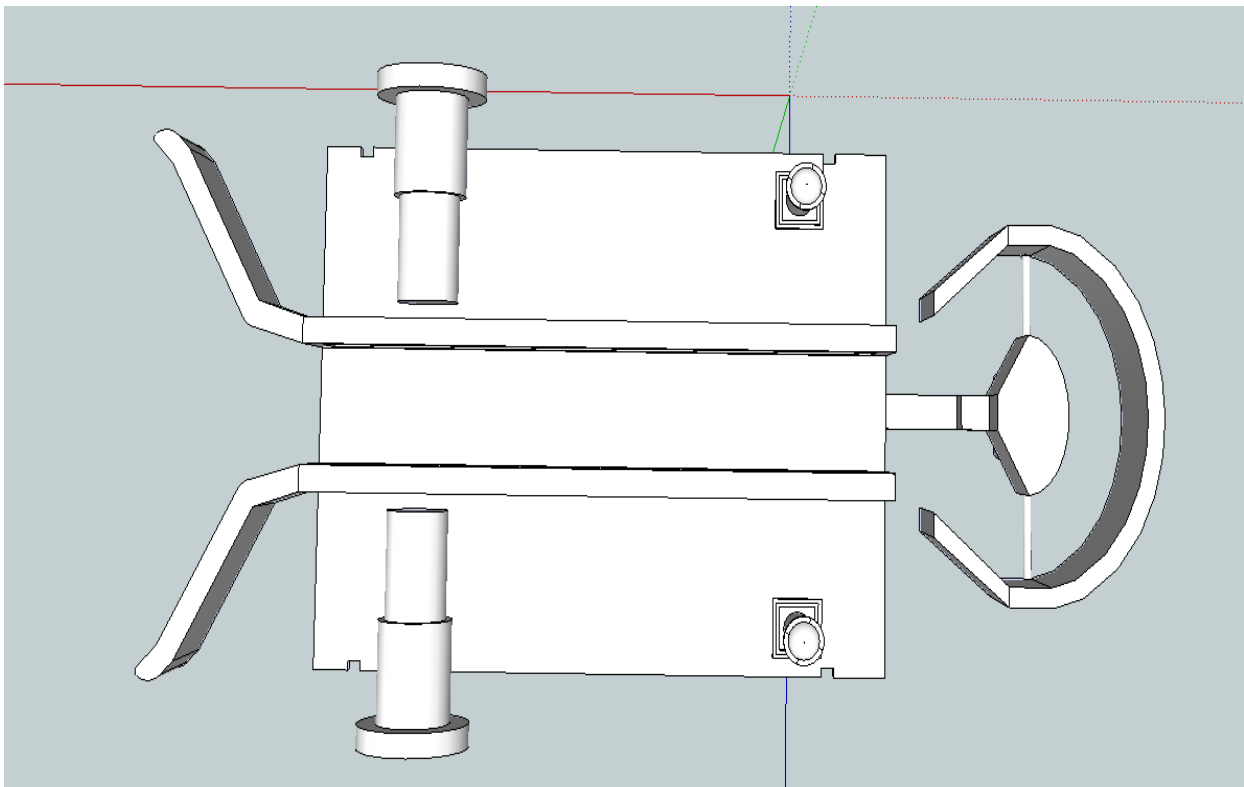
Under-chassis view of the robot showing the 'Y-shaped' channel, the rectangular channel and the semi-circular block arranging component
